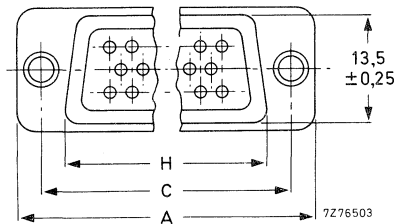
Terminal side of pin (or socket) connector; see also Table 3.
